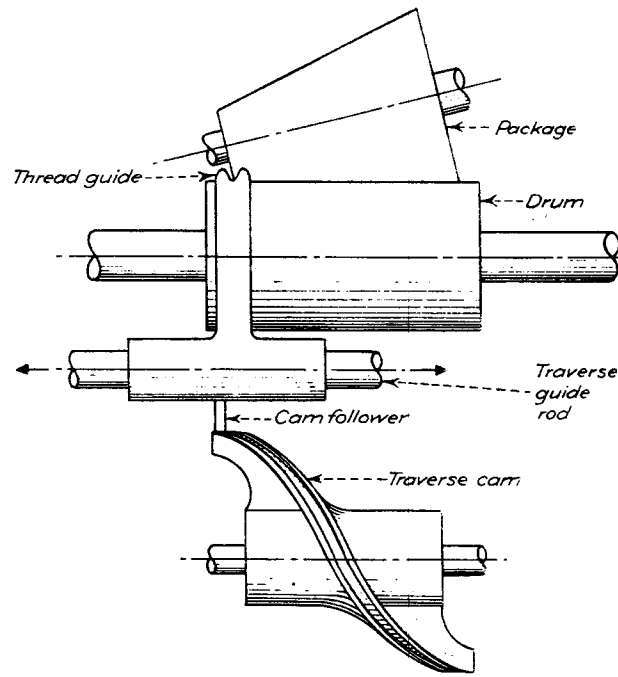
Traverse cam imparts reciprocating motion to cam follower which drives thread guides on traverse guide rods. Package is friction driven from drum. Yarn is drawn from the supply source through thread guide and transferred to the drum-driven package. Speed of this type of mechanism is determined by the weight of the reciprocating parts.
